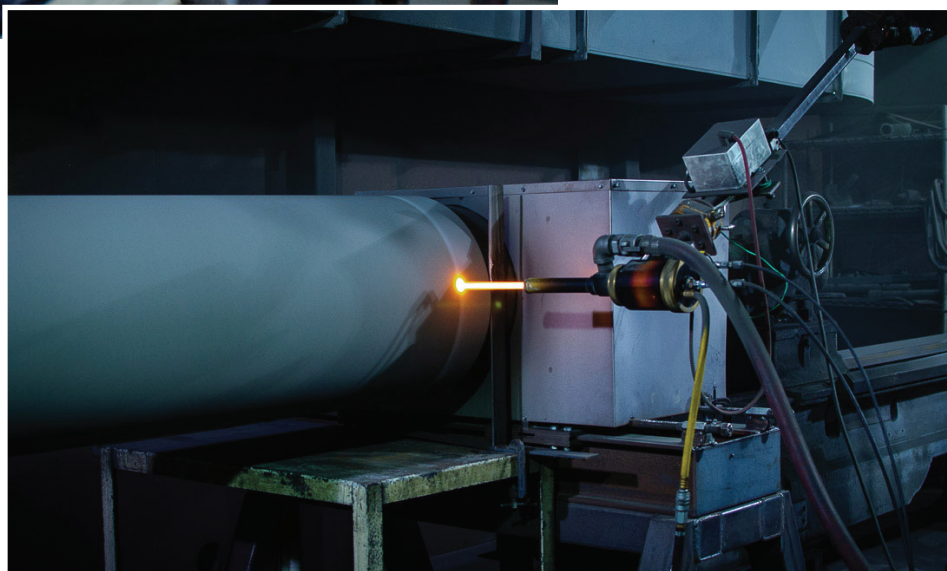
HVOF tungsten carbide coating for large rolls.
